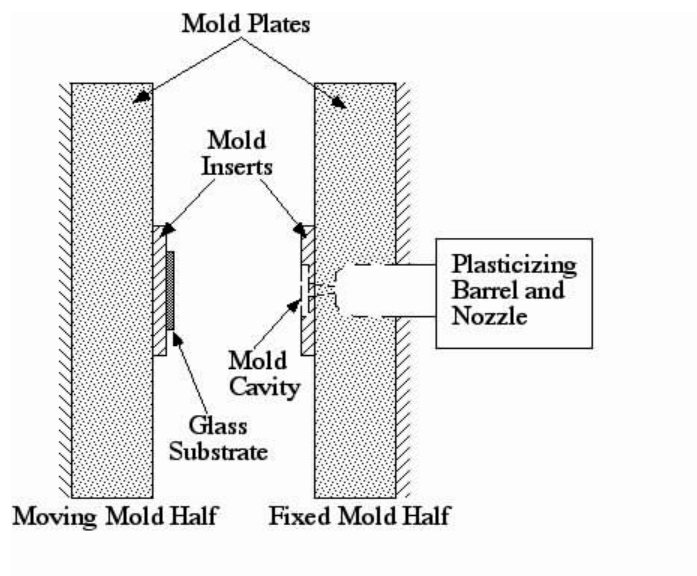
Side View of Mold Design Concept for Injection Molding on Glass Substrates
